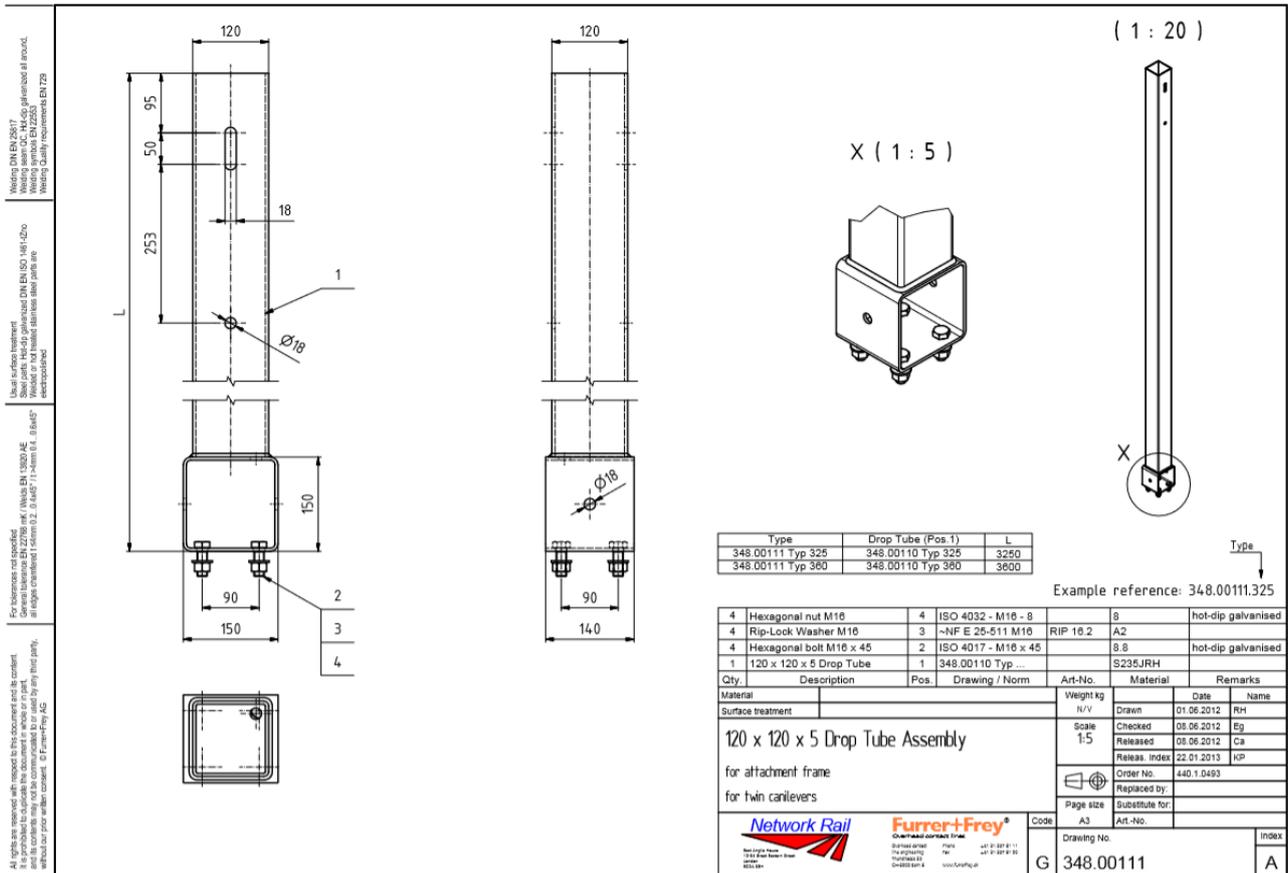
120 x 120 x 5 Drop Tube Assembly layout
